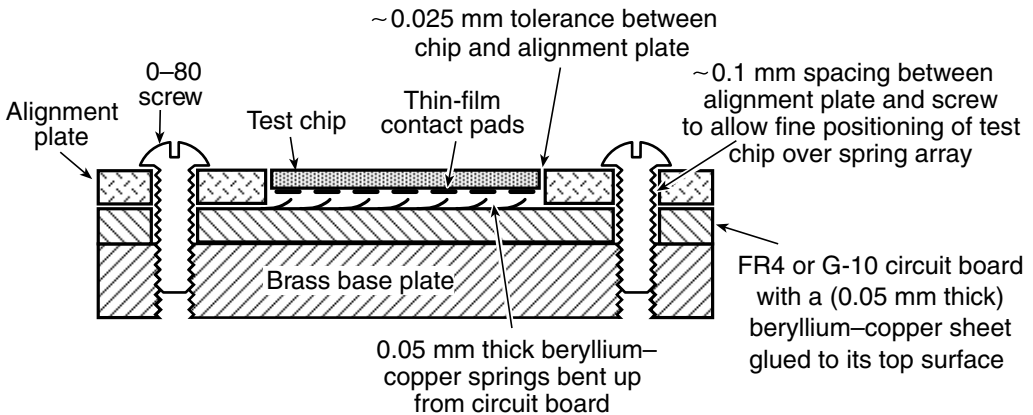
Contact microsprints patterned into a 0.05 mm thick beryllium–copper sheet that is glued to a 1.6 mm FR4 or G-10 circuit board. (The number of contacts is much higher and the spacing much smaller than that shown in this simplified sketch.) Precise alignment between the test chip and contacts is provided by an alignment plate. The test chip is flipped upside down, dropped into the alignment frame, and pressed down against the microsprints with a spring-loaded pressure plate (not shown) (from Hamilton 1982).
